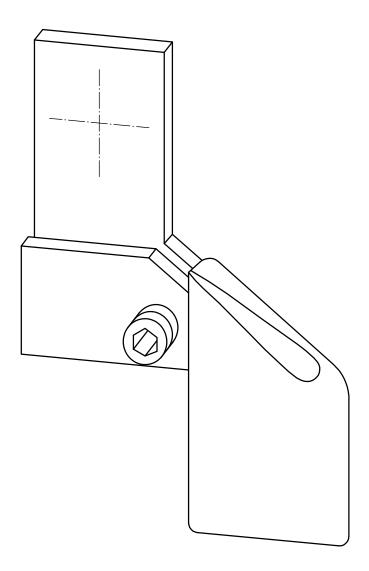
Test specimen clamped in upper clamp with the free end folded outwards over the sloping edges of the clamp
